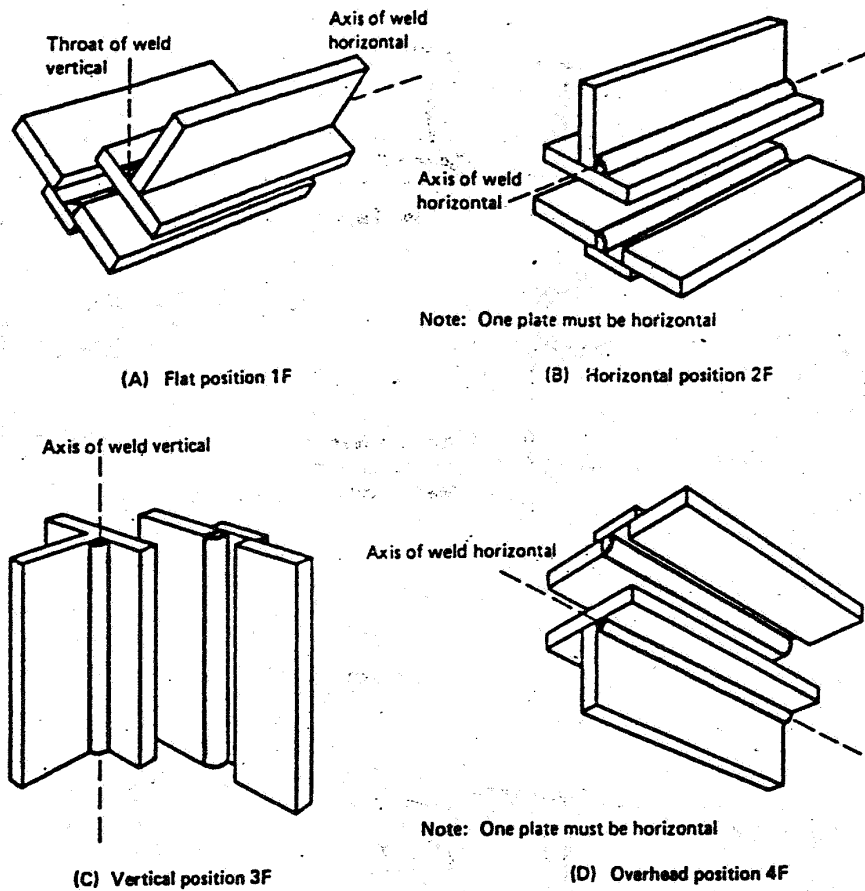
Positions of test plates for fillet welds
